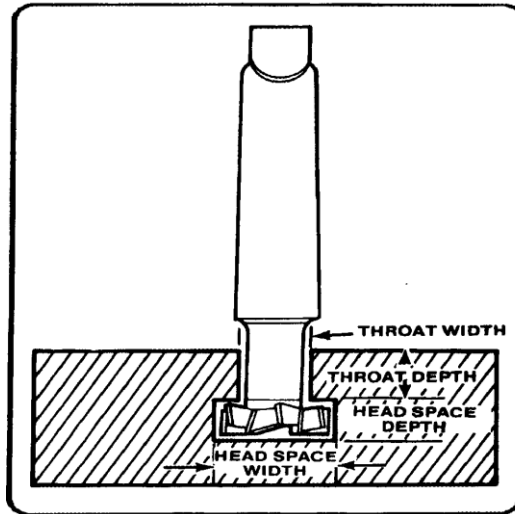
This figure shows the measurements for a T-slot mill bit which will be used in the fabrication of the vertical slot design [7].
